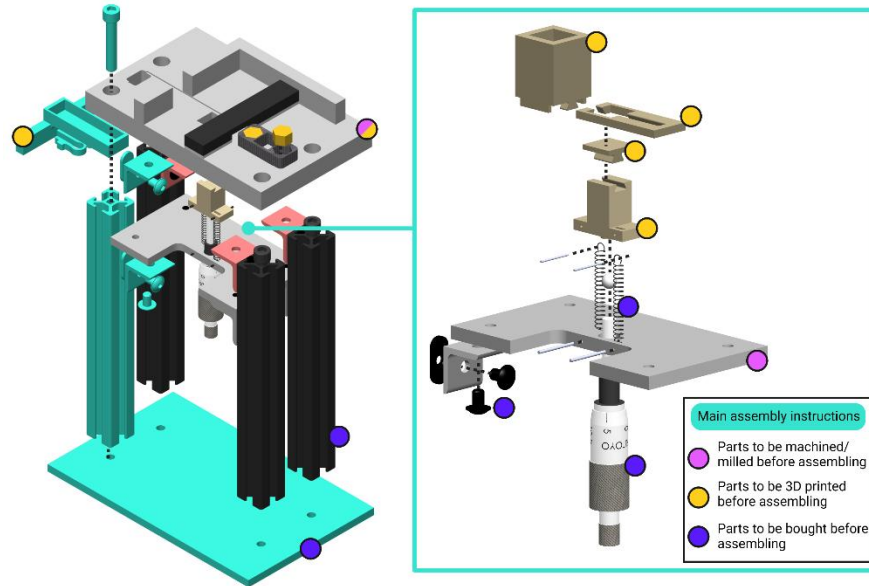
Frame and stage assembly process, showing exploded view of the stage assembly. Parts recommended to be printed or machined are indicated. Though only the Ink-Cartridge Top Plate is shown, the concept is consistent for corresponding parts on the Spray Top Plate.
